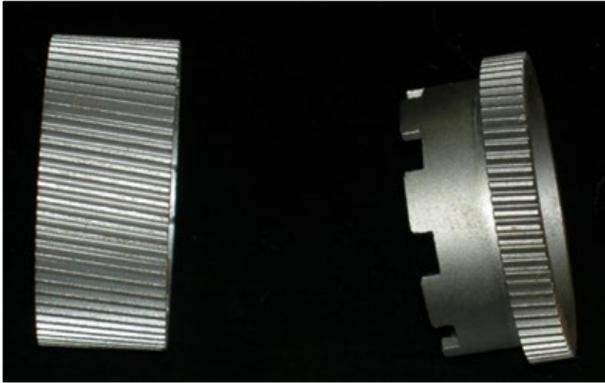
Super Abrasive Machining is used to produce the helical drive gear shown right, directly from the heat treated blank seen on the left
